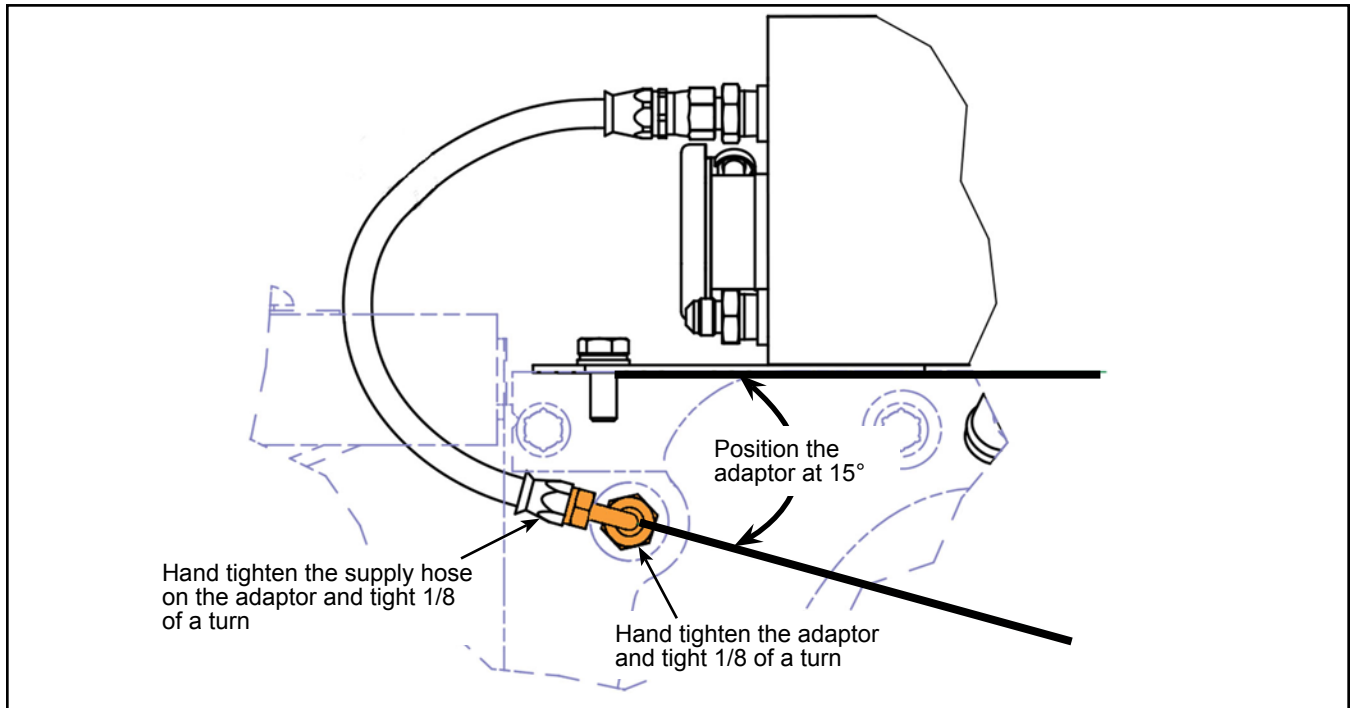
Position of the Adaptor on the Radiator Collector and Supply Hose Installed
